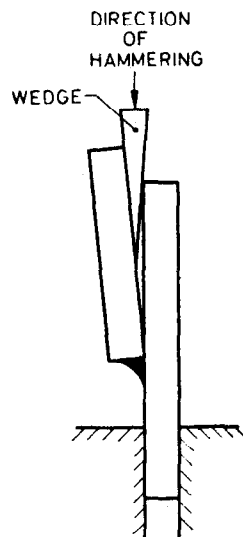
SPLITTING THE WEDGE TEST SPECIMEN WITH A WEDGE
